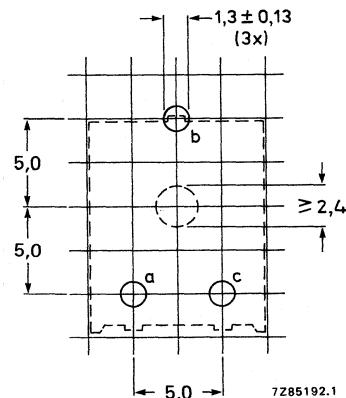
Hole pattern for horizontal versions, viewed from component side.
